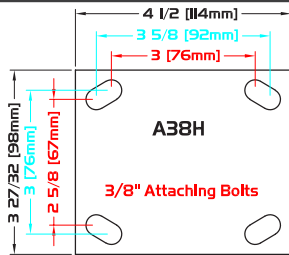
PLATE: Same top plate and bolt hole spacing as our 1900, 6400, Maxx™, EMaxx™, 7000, 7900 and Tornado series
